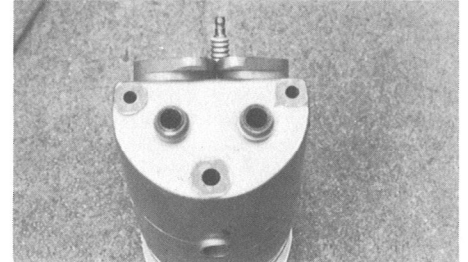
A top view of one of the specially-fabricated Corvair cylinders. This cylinder includes an integral combustion chamber. Note the spark plug and mounting pads for the intake and exhaust manifolds. Hole shown at the bottom of the photo is the water inlet. The two larger holes at the top of the cylinder are for the intake and exhaust stems, while the three smaller holes are for mounting the rocker box removed from the old Corvair head. (Bob Helt photo)
